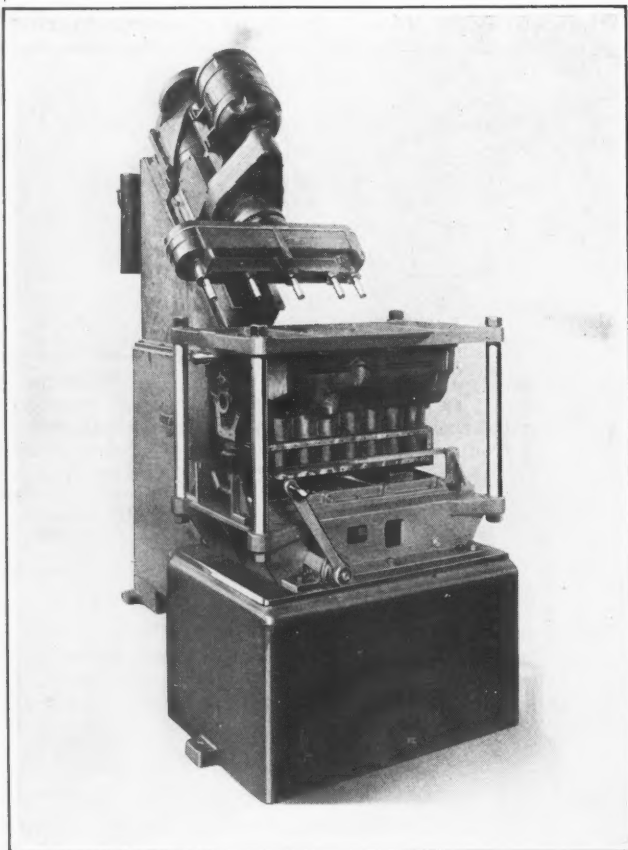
Five-spindle Baush Tapping Machine Used in Tapping Angular Holes in Manifold Side of Cylinder Block
